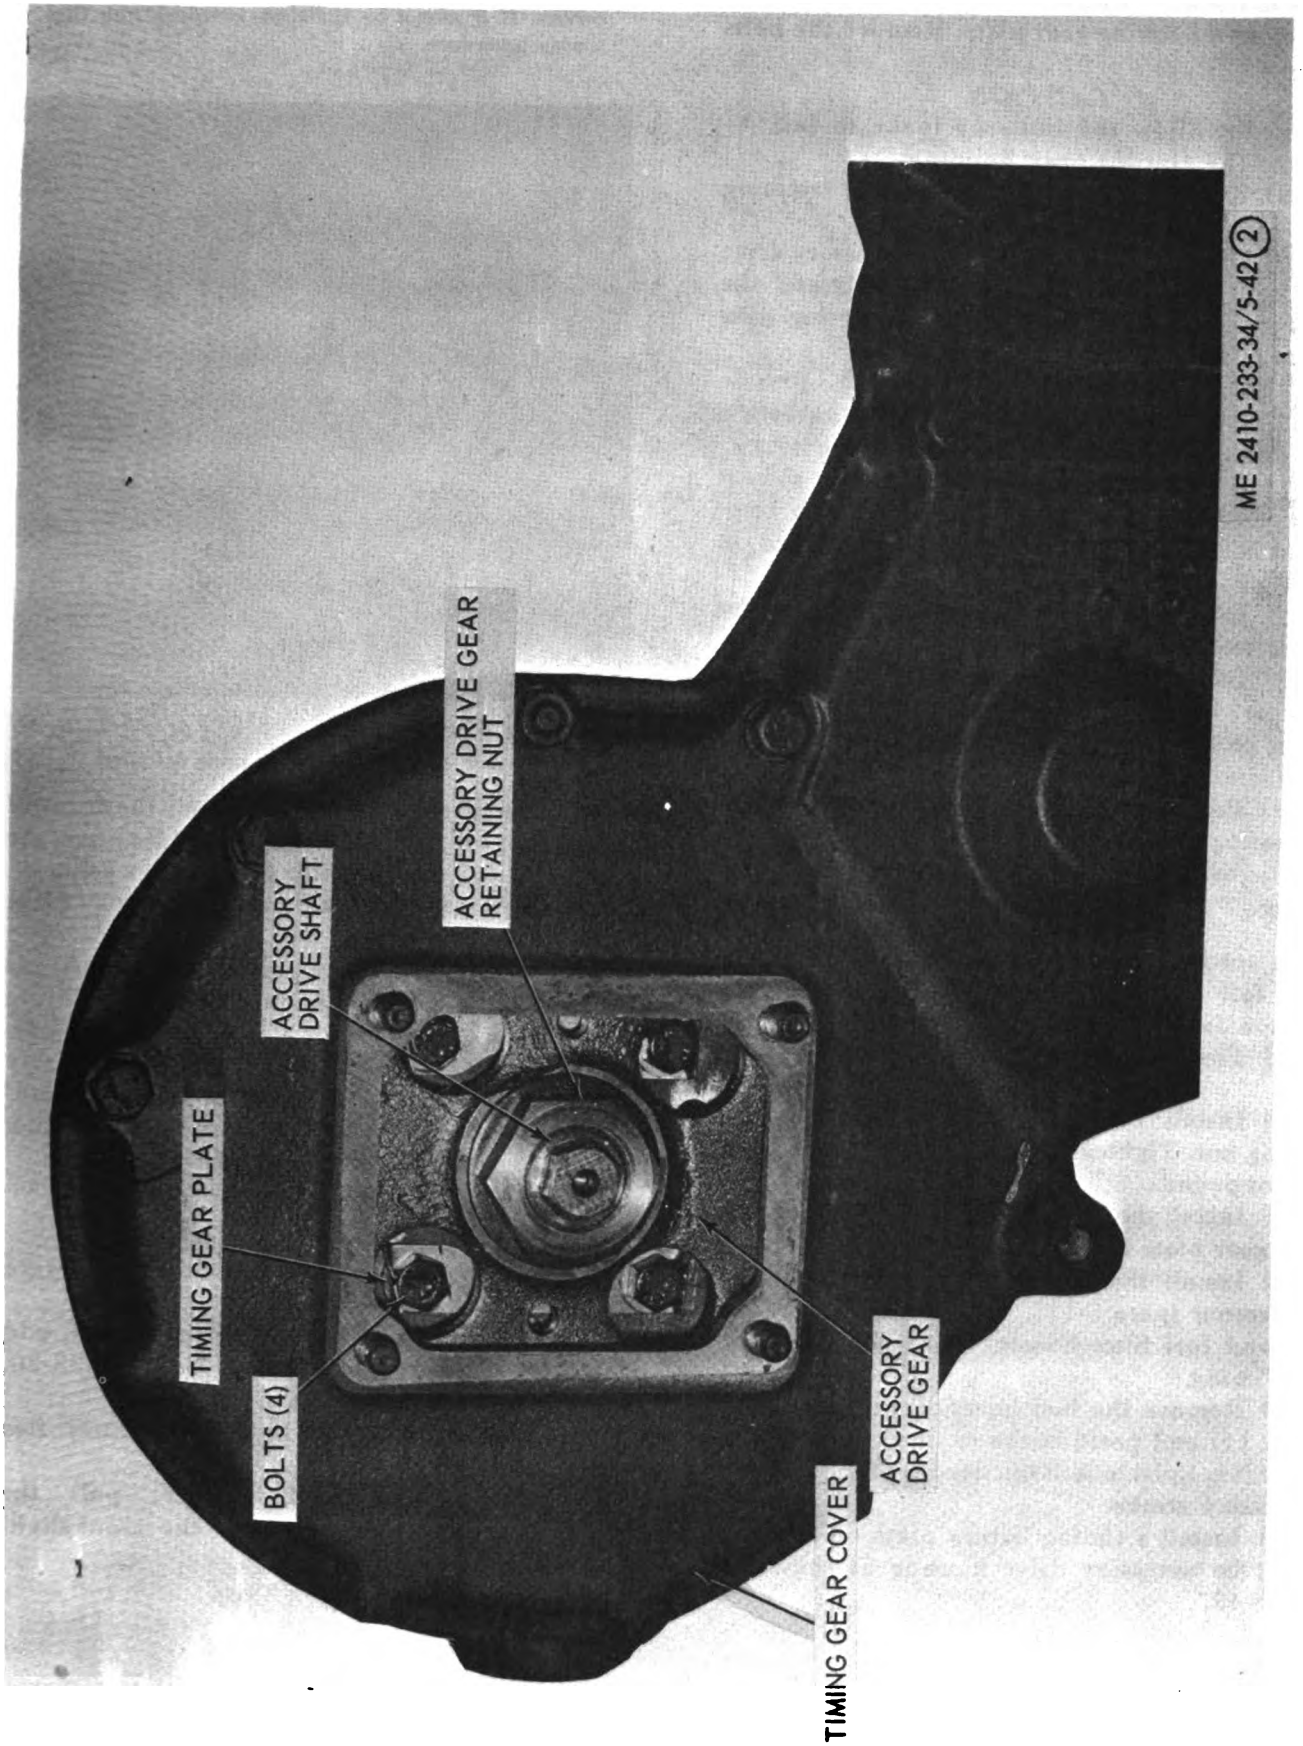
Accessory drive shaft, removal and installation (sheet 1 of 2).
